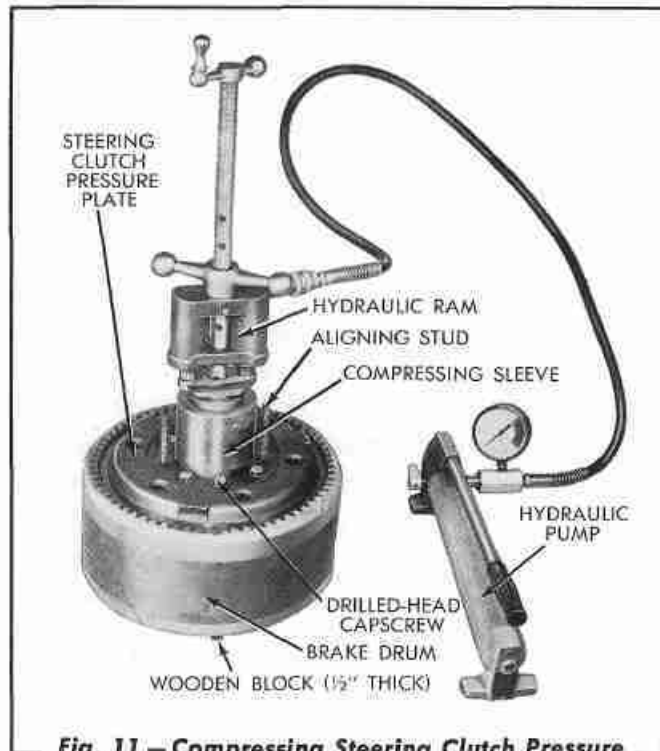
Compressing Steering Clutch Pressure Springs to Install Capscrews
